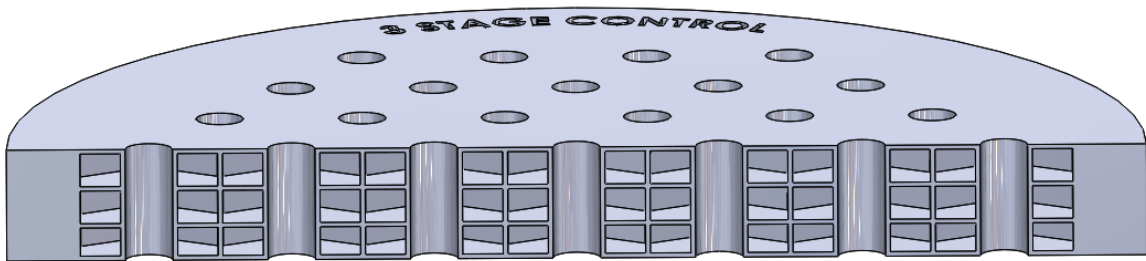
MIMO - Straight Pipe Panel - CAD - Vertical Cross-Section View
